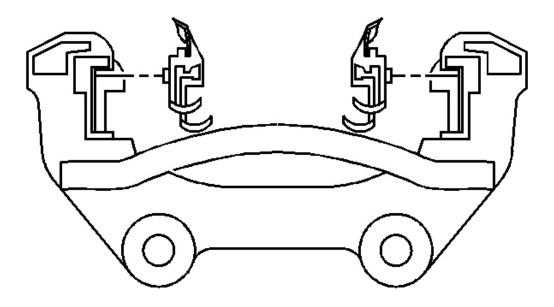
View Of Caliper Courtesy of GENERAL MOTORS CORP.
